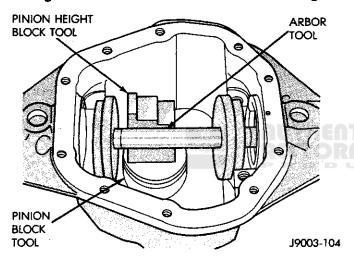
Pinion Height Block Tool Against Arbor Tool
